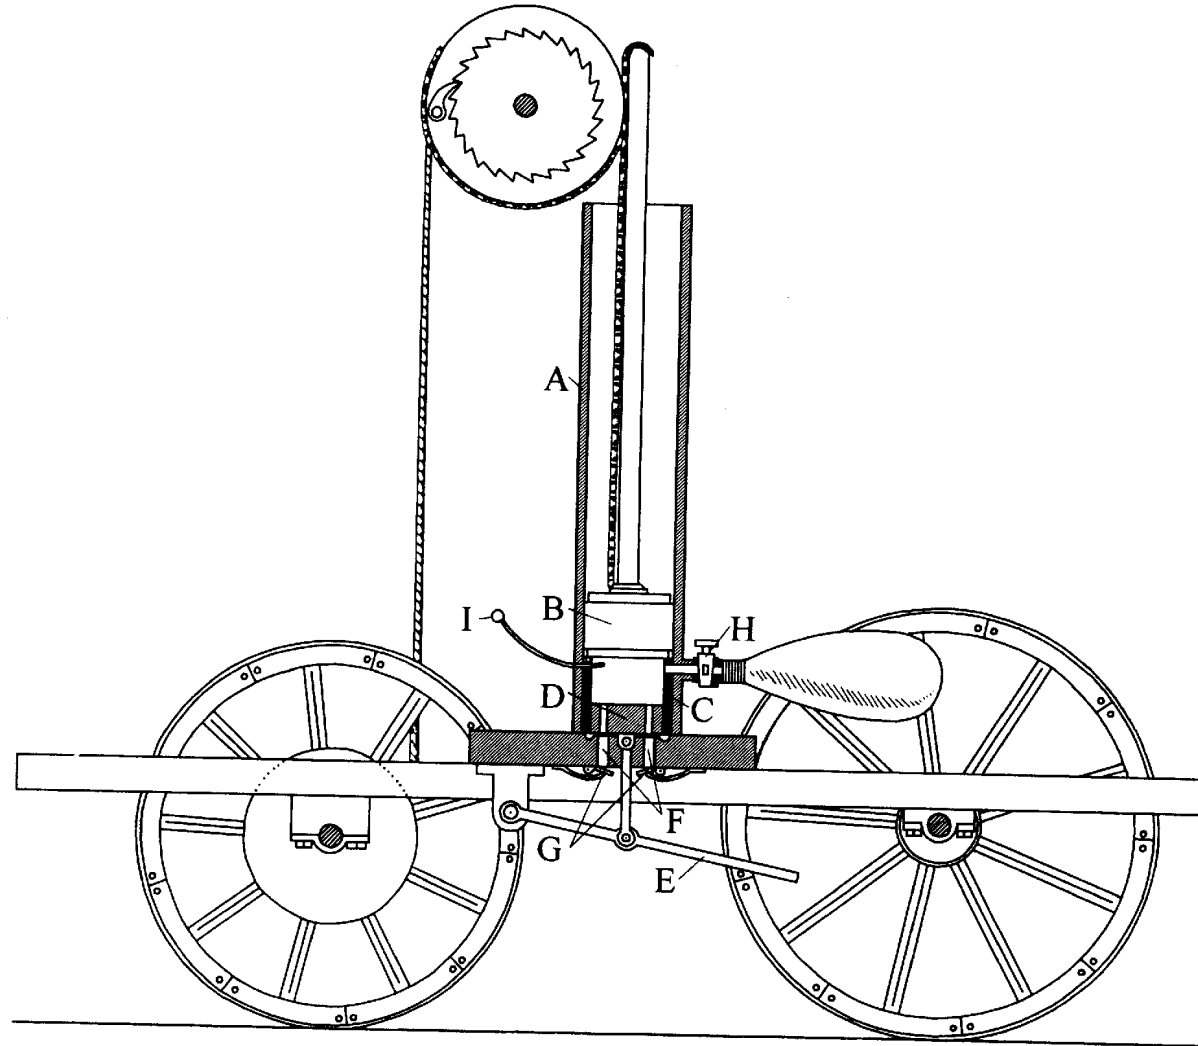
Patent drawing of Rivaz's horseless carriage (1807)¹⁷
